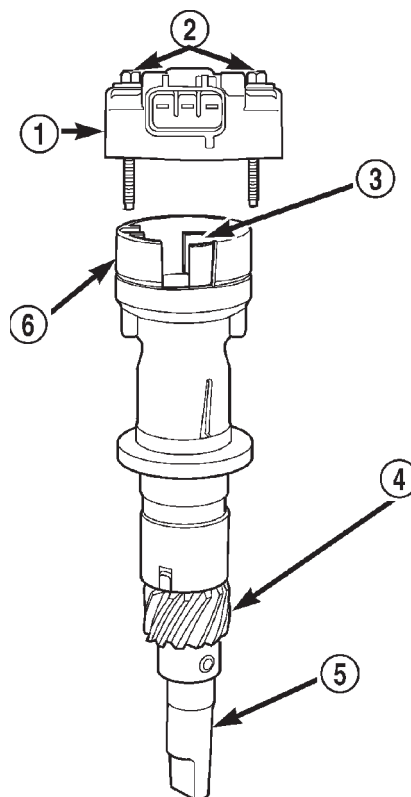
CMP and Oil Pump Drive Shaft—4.0L Engine
